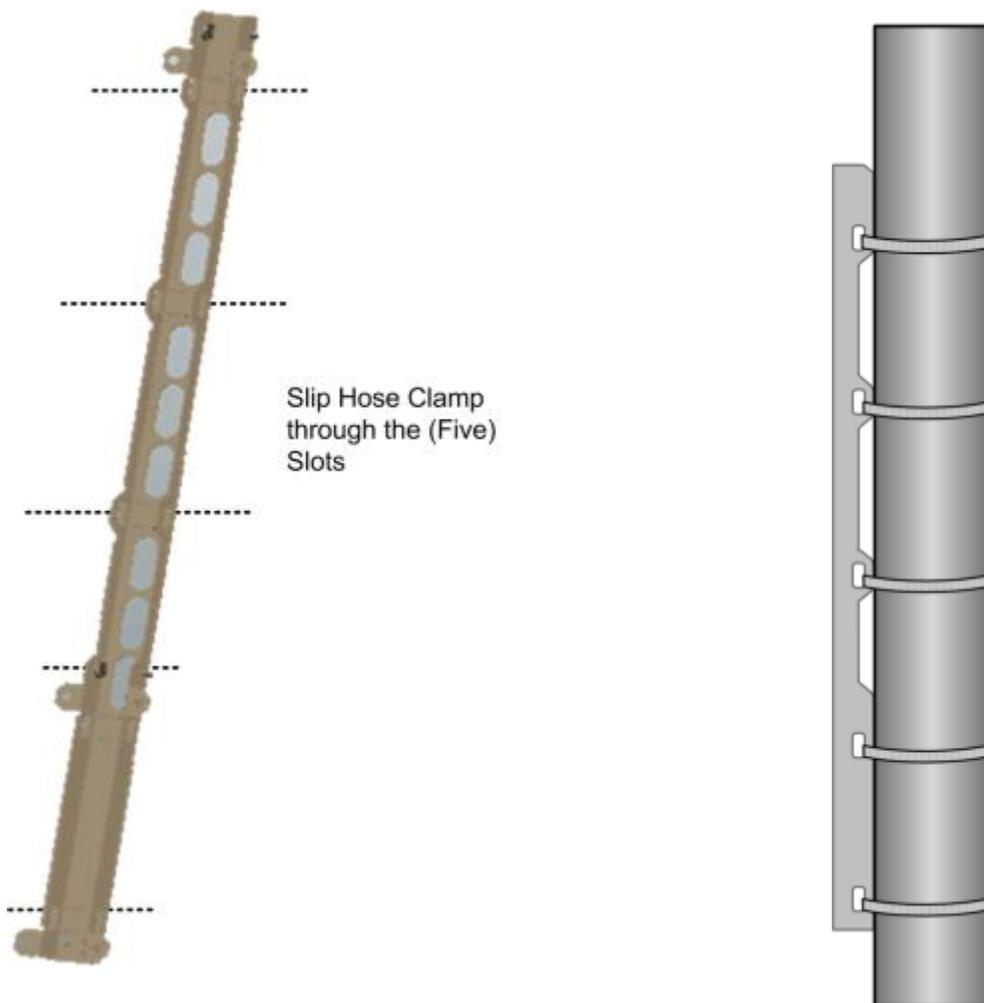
Bracket Slots for Hose Clamps (Left) and View of Bracket Mounted on Pole (Right)
